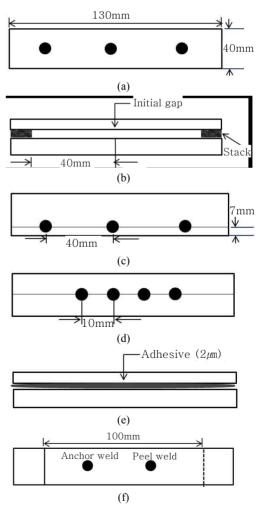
Test coupons configuration and dimensions for (a) Reference weld, (b) Initial gap, (c) Flange weld, (d) Shunt weld, (e) With adhesive and (f) Peel test
